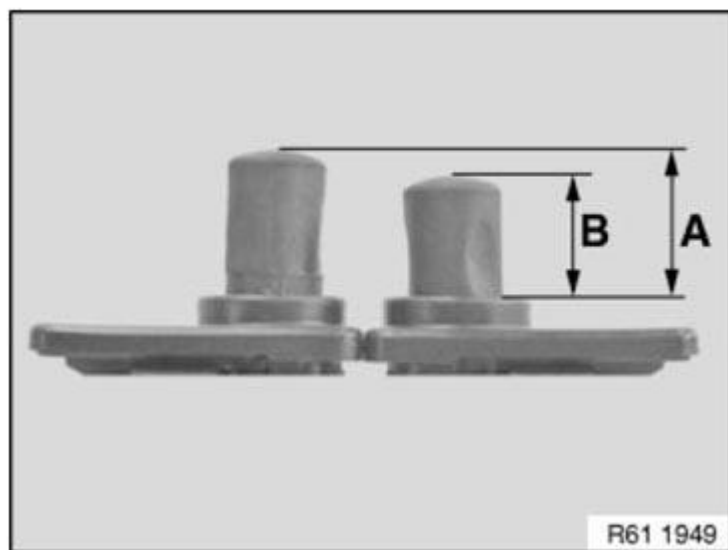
Identifying Engine Hood/Bonnet Basic Setting And Workshop Mode
